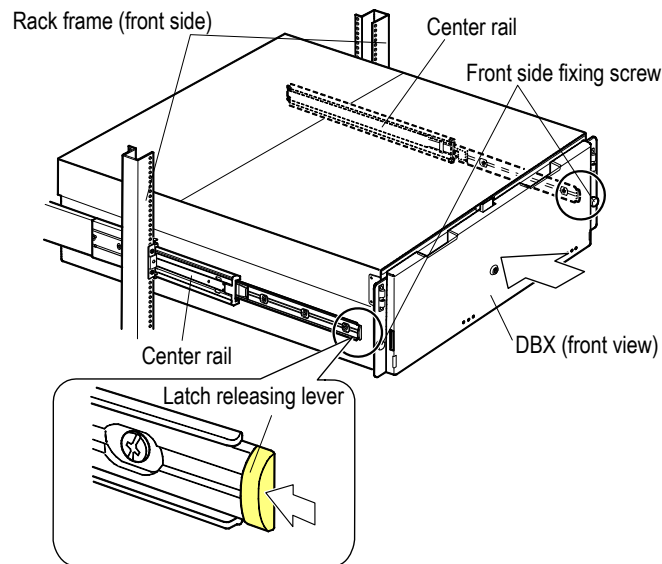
Fixing the Front Side of the Array (Drive Box (4U))
